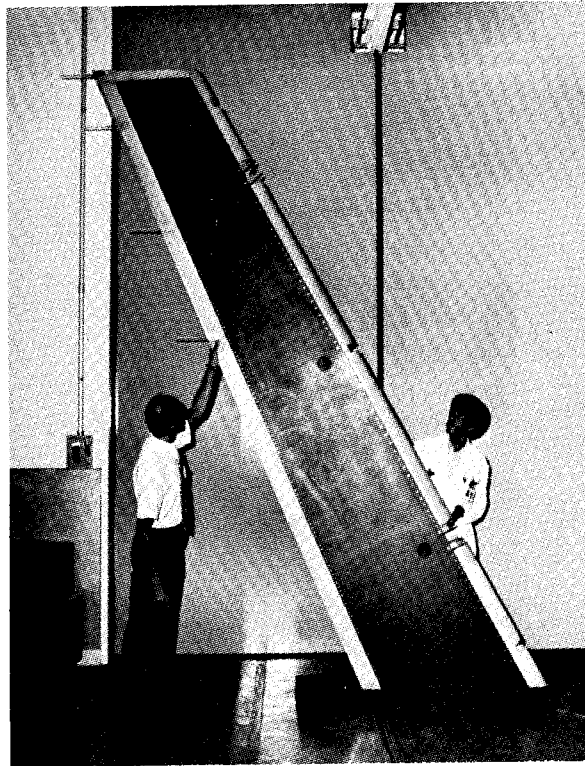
GROUND TEST RUDDER ASSEMBLY
